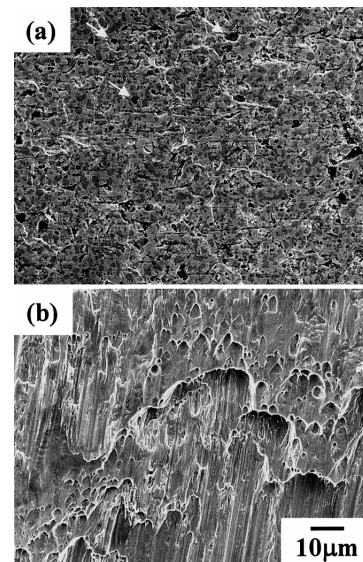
SEM micrographs of fracture surface of stainless steel/stainless steel joints after shear test. The joints were fabricated at (a) 1023 and (b) 1173 K for 3.6 ks after coating.
